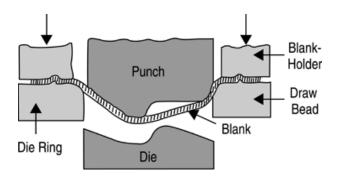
A schematic section of a typical stamping die. The sheet contacts only the punch or the die at any point. Membrane stresses stretch the sheet over the tools.
